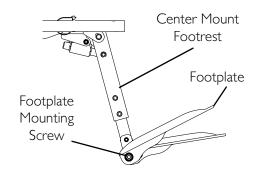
Adjusting the Footplate Angle - Before 2/15/07
